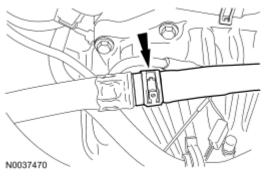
Locating Heater Hose Inline Connector Courtesy of FORD MOTOR CO.
